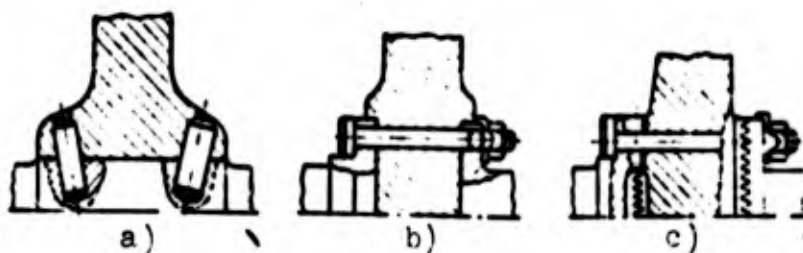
Types of joints of turbine disks with shafts: a) pin; b) flanged; c) on face slots.
